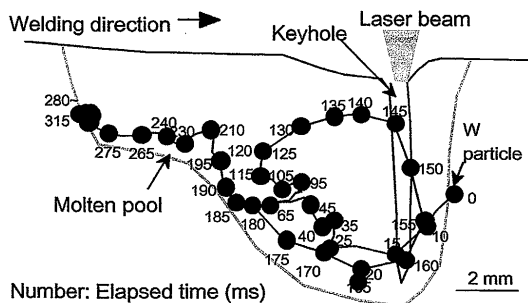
Measured movement of bubble during CO₂ laser welding of A5083 alloy.
